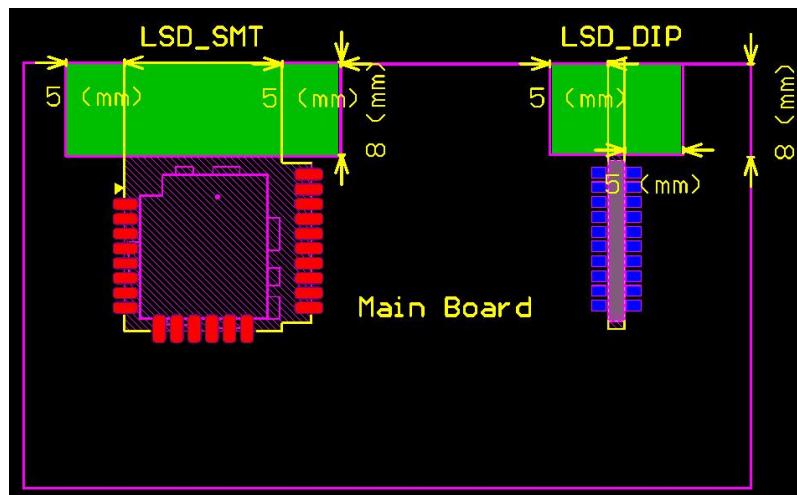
The PCB antenna is placed along the board side and is not clad with copper
